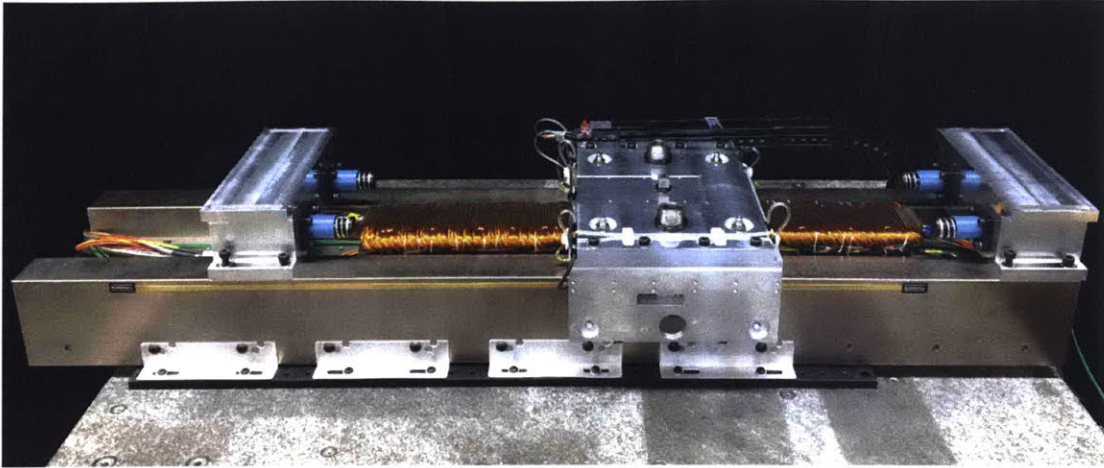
The completed assembly of the linear stage setup with our new fine-tooth motor.
